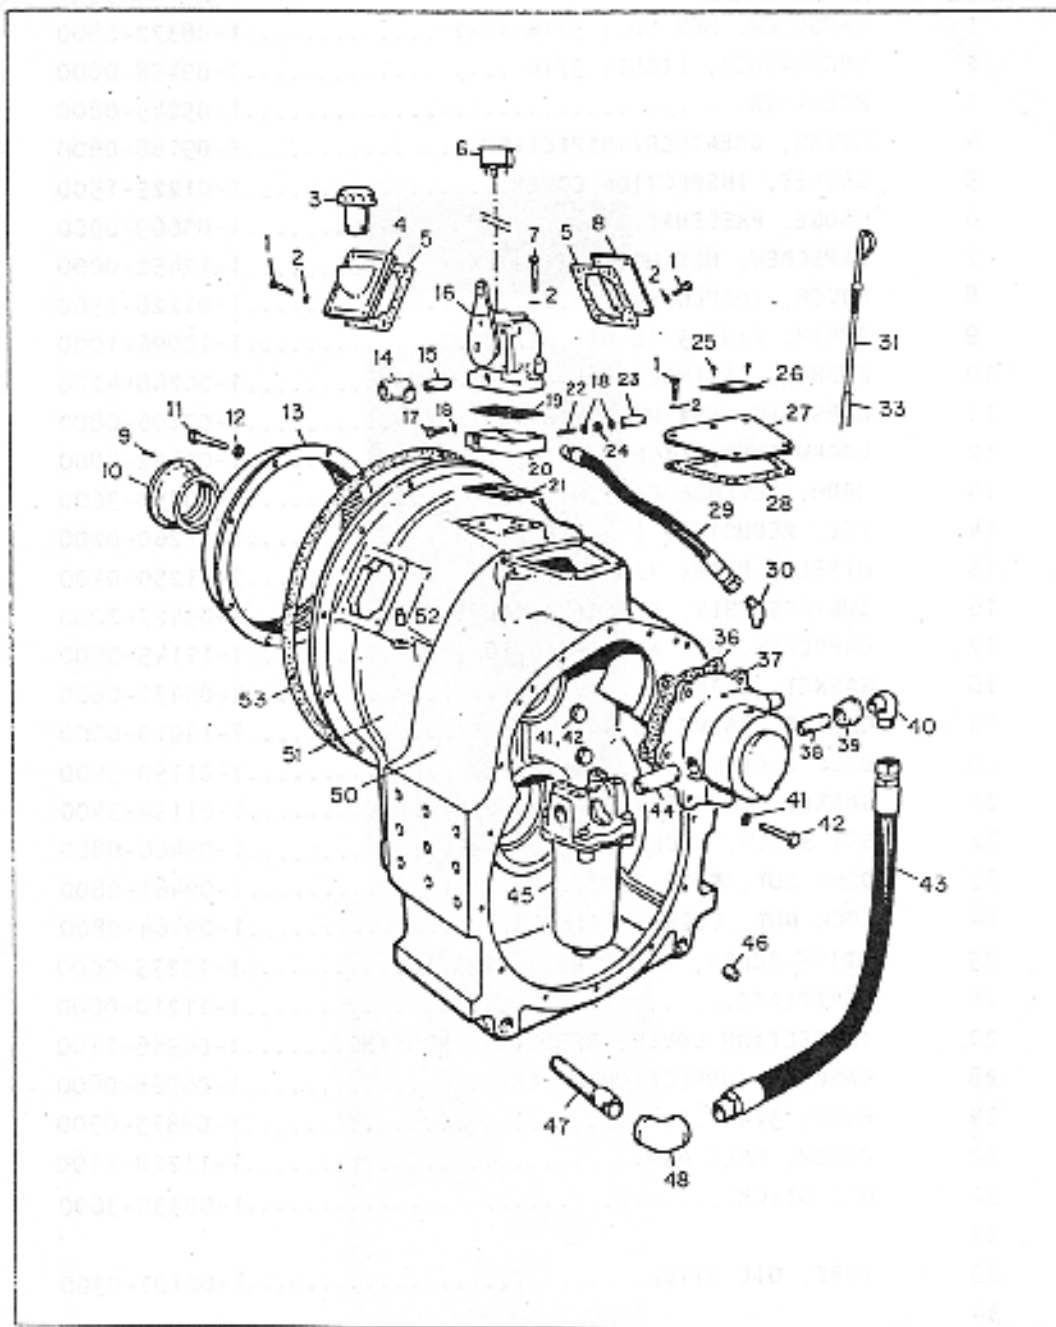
HOUSING AND RELATED PARTS HY-6900
